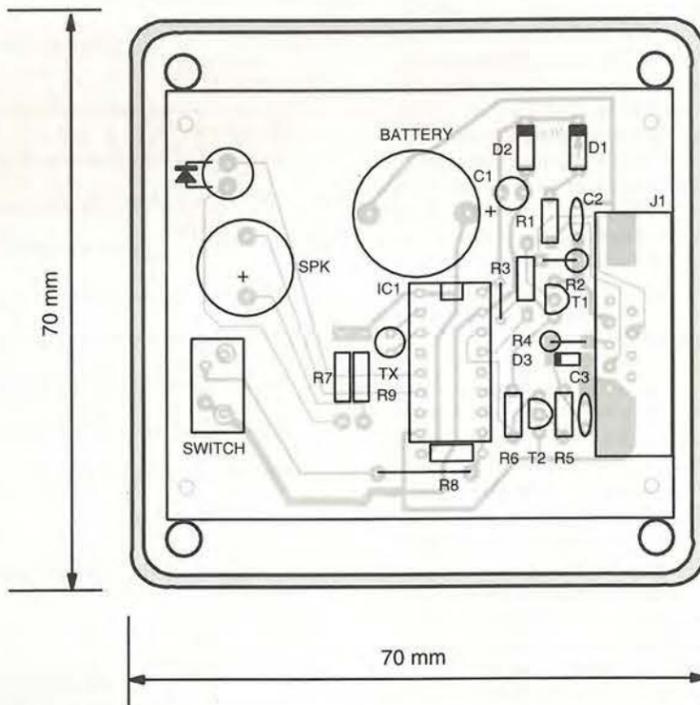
The single-chip temperature logger can be constructed on a single-sided board and housed in a vented box. This figure shows the component layout of the PCB.
